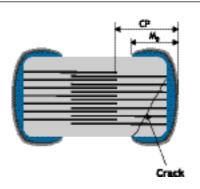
Open-mode design (CP>MB) – circuit open during cracking.
